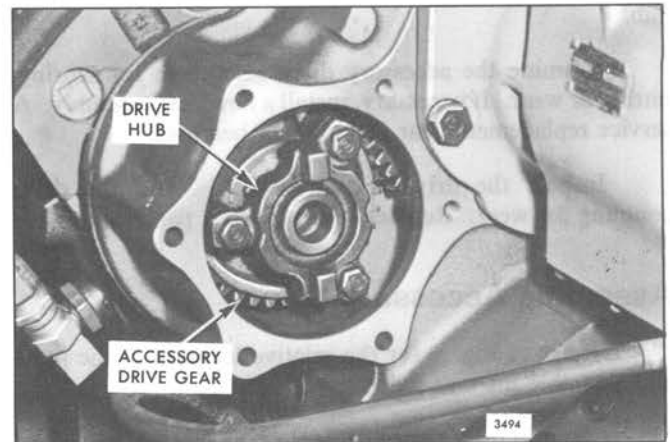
Rear Left Bank Accessory Drive Mounting
